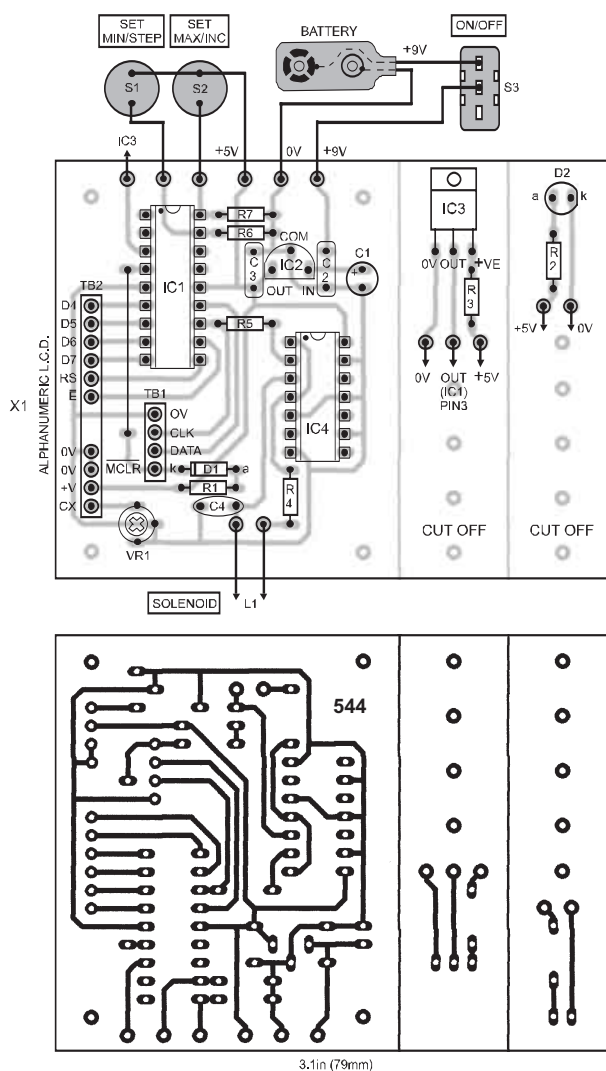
Printed circuit board component and track layout. Note the two sub-sections which are to be cut off
